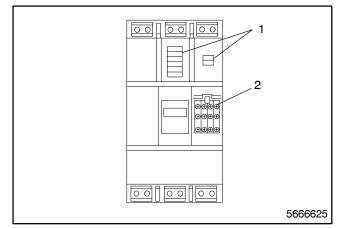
Auxiliary Switch Removal, 40-630 Amp Models
